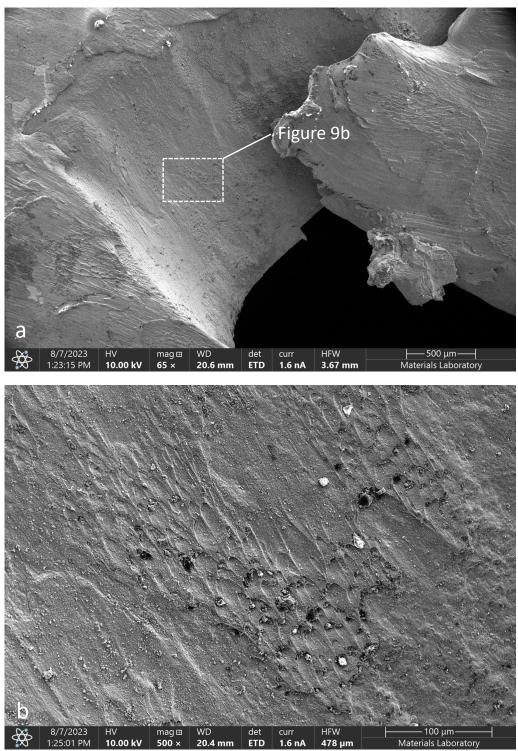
Close scanning electron microscope images of the bearing shaft fracture surface from the Station 3 portion of tilt slde anti sag roller bearing mount (see figure 9 for the specific location). The fracture features are consistent with monotonic overload.
